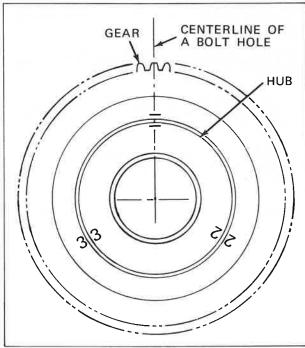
MATCH-MARK NUMBERS ON BACK (FRAME) SIDE OF HUB AND GEAR.
